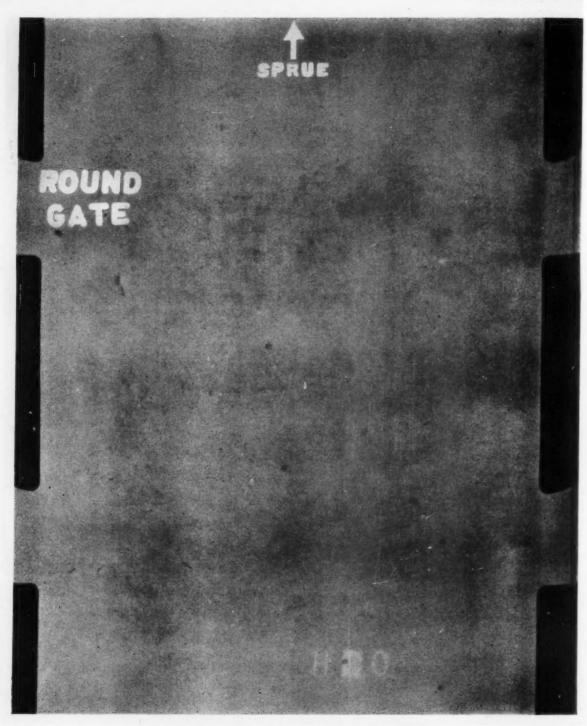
Photo of X-ray film of casting represented by Fig. 50. Substantial freedom from internal dross defects is representative of many castings made by this method.
